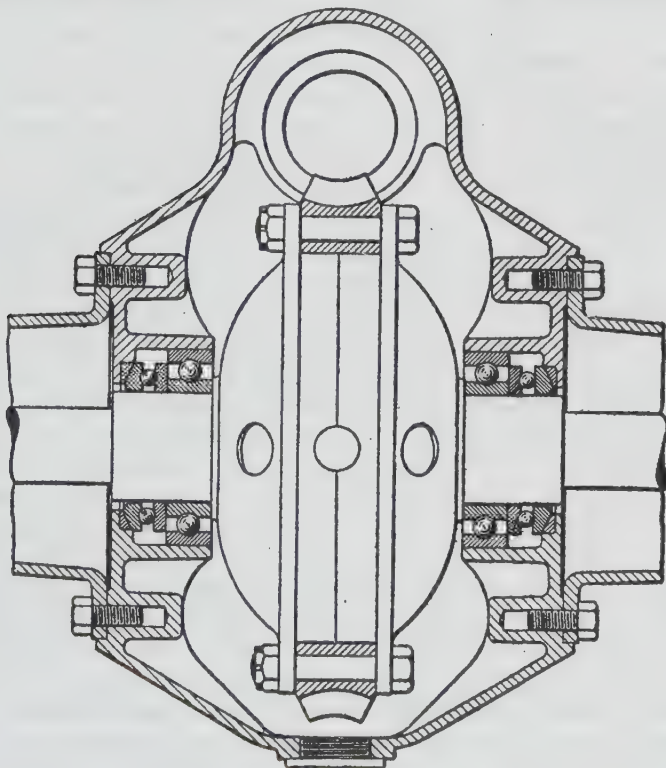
MOUNTING OF WORM DRIVEN DIFFERENTIAL.
